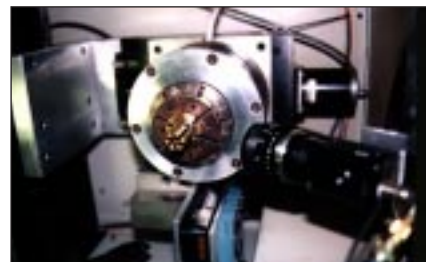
The chuck in a 4-axis positioning system for laser engraving
